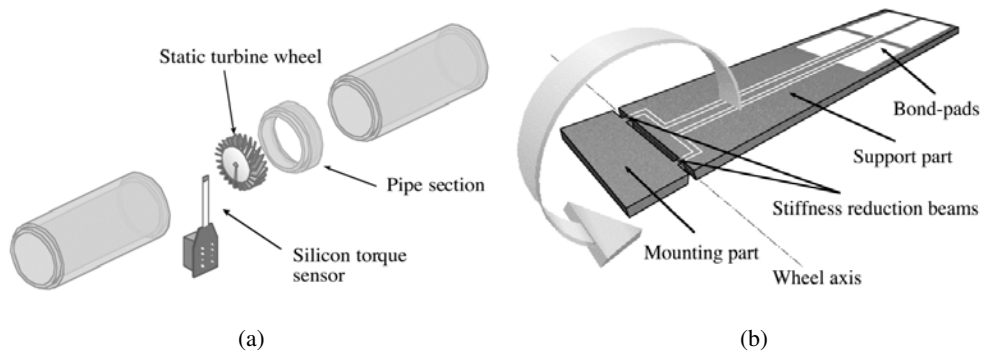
(a) The static turbine includes a turbine wheel mounted on a torque-sensing device. (b) The torque-sensing element composing of three parts: the supporting part, the mounting part and two stiffness reduction beams [15].
